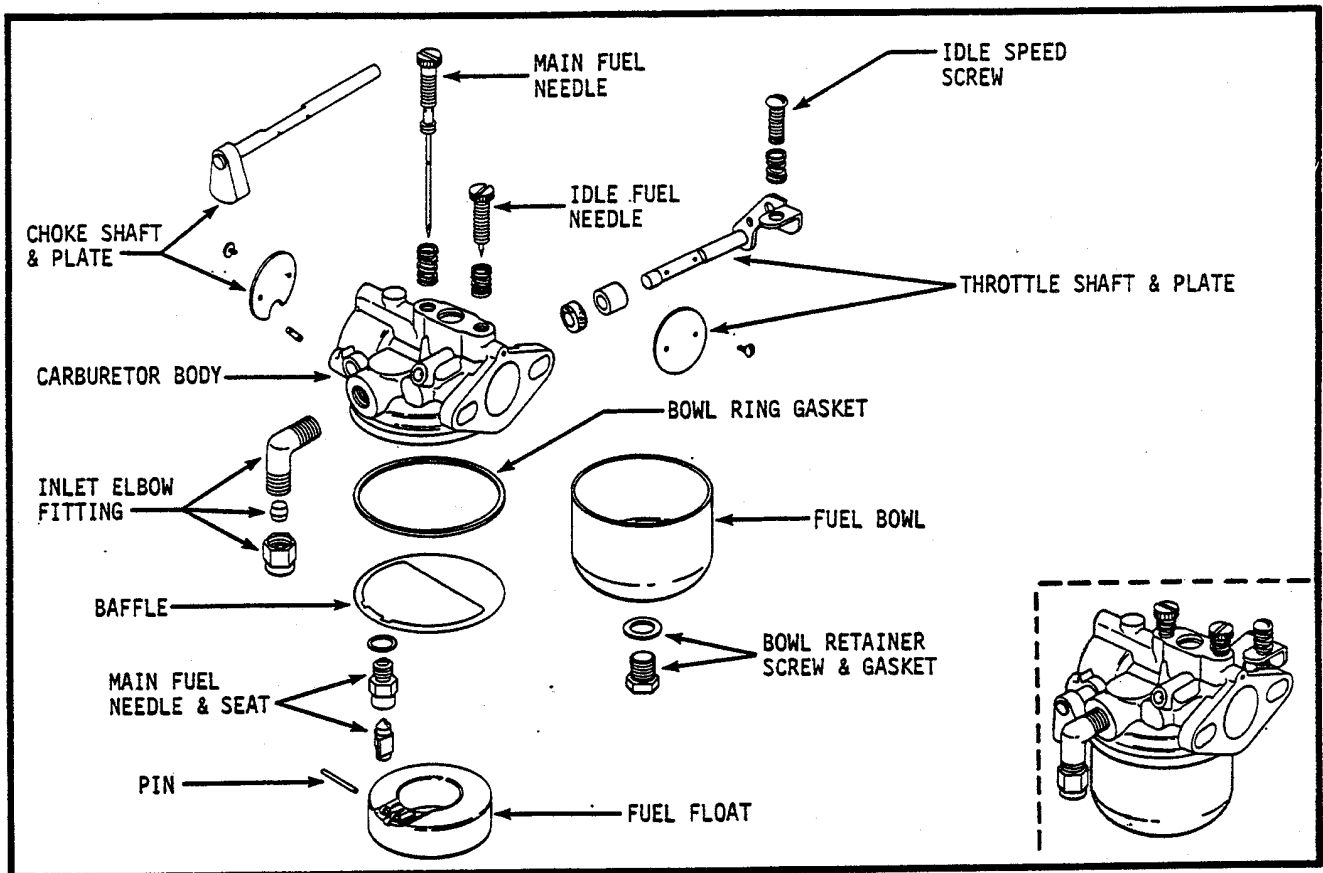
EXPLODED VIEW - TYPICAL SIDEDRAFT CARBURETOR
